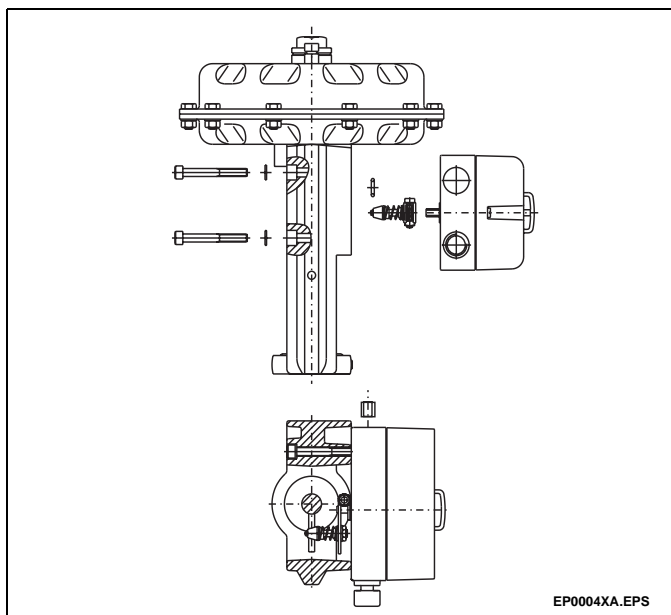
Integral mounting to 23/24 + 23/25 control valves
